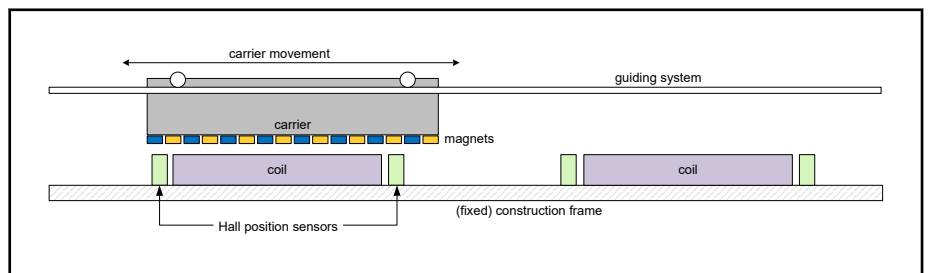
Mechanical construction coil, carrier, magnets and Hall sensors
